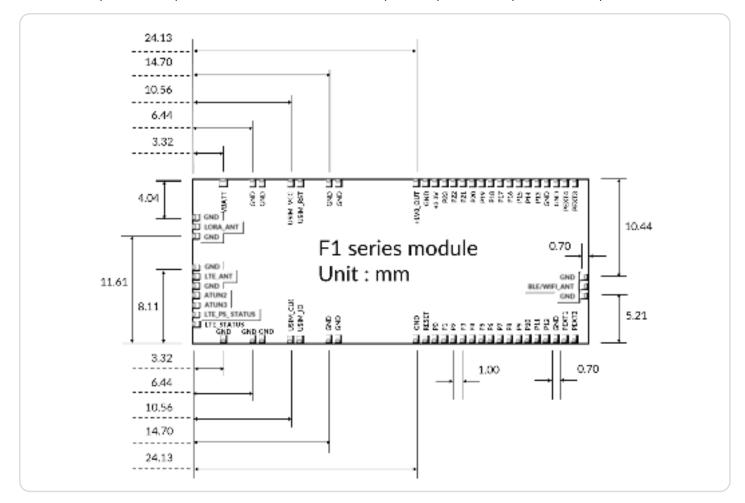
F1 Smart Module Pin Dimensions, Pin Pitches and Pin Locations (Top View)
